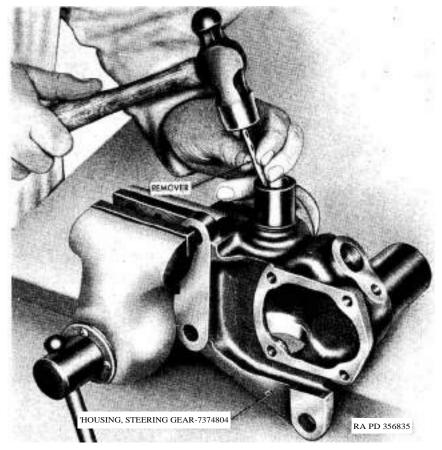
Removing worm upper bearing cup from steering gear housing with an improvised remover.
